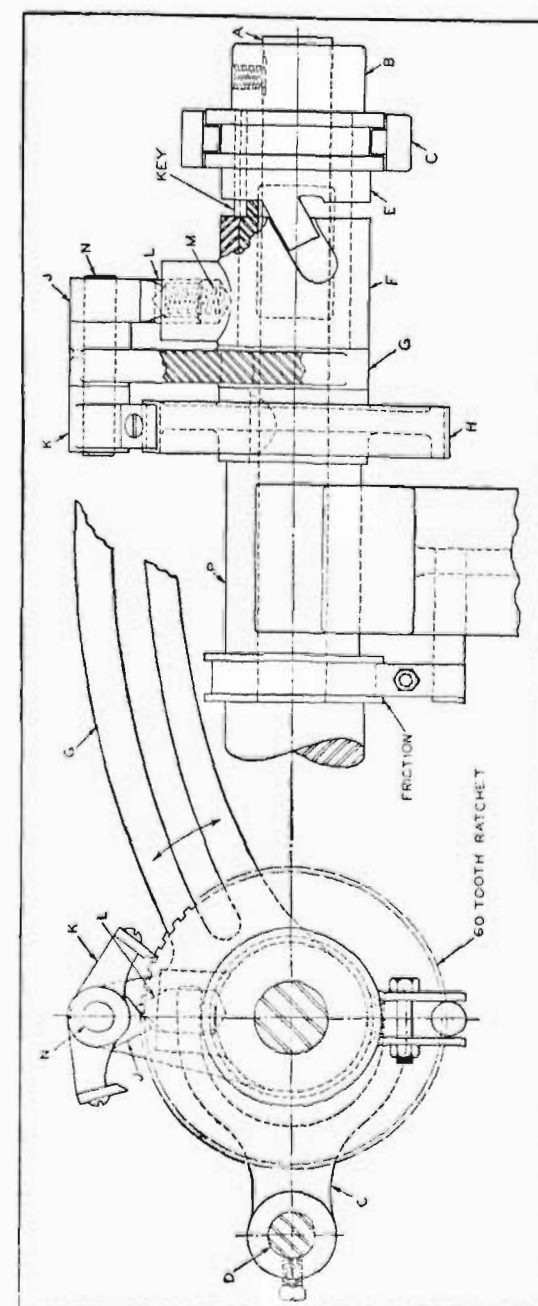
Feed-screw Reversing Mechanism Using Double-pointed Pawl which can be Positioned to Revolve Ratchet Wheel Forward or Backward.
